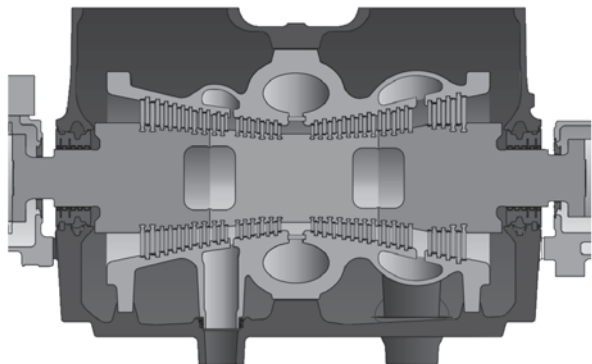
Inner casing of a HP part with *shrink rings*. (Courtesy Alstom)
